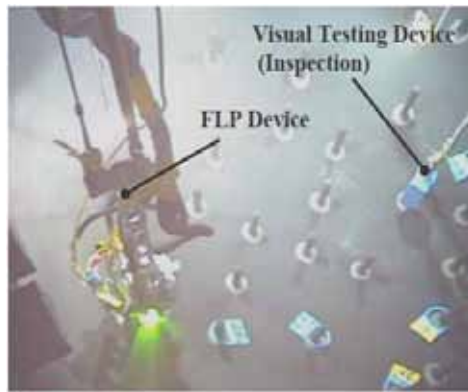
Photo of FLP device for J-groove welds of BMI
